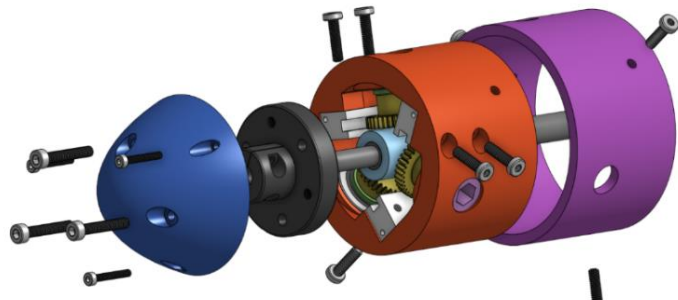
Exploded view of the aluminum (purple) reinforced hub.
